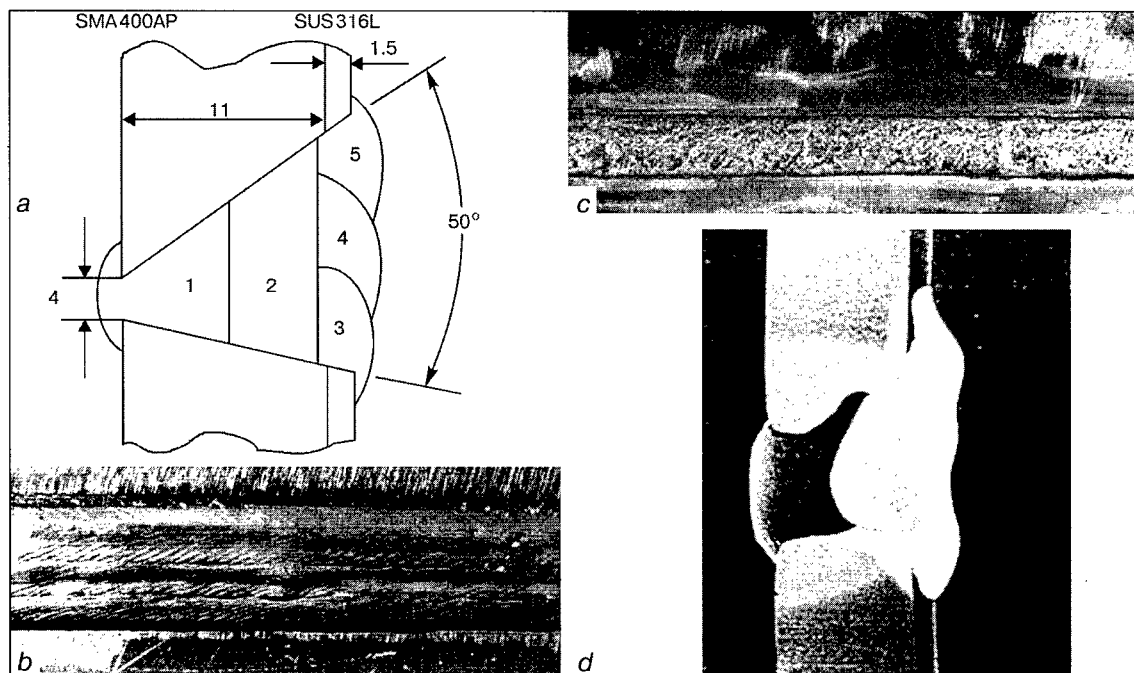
Results of two wires welding with ECMP of joints with V-groove: *a* — butt geometry and sequence of passes; *b* — cross section; *c* — surface of a last layer; *d* — reverse side of the first pass
